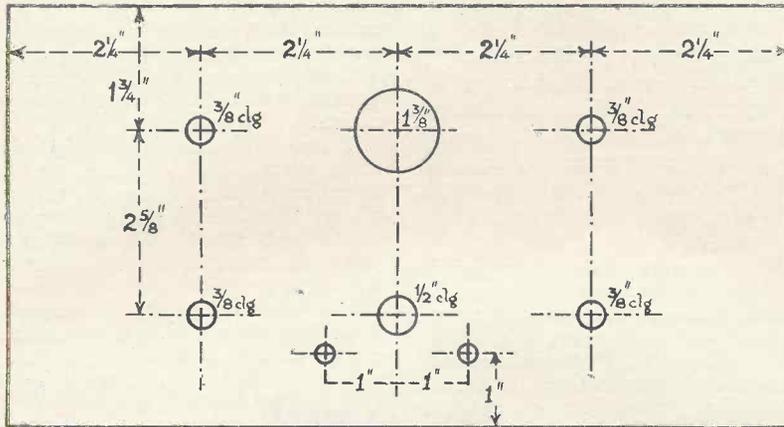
The box is drilled with several holes, the exact dimensions being as above.
